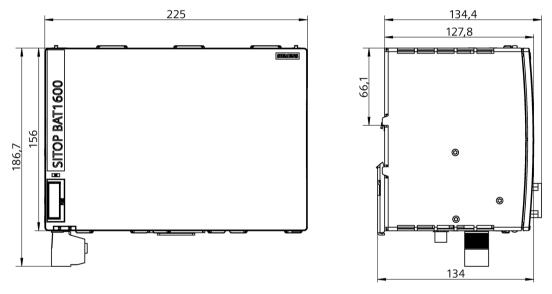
Dimension drawing 6EP4134-0JA00-0AY0 (7.5 Ah)
